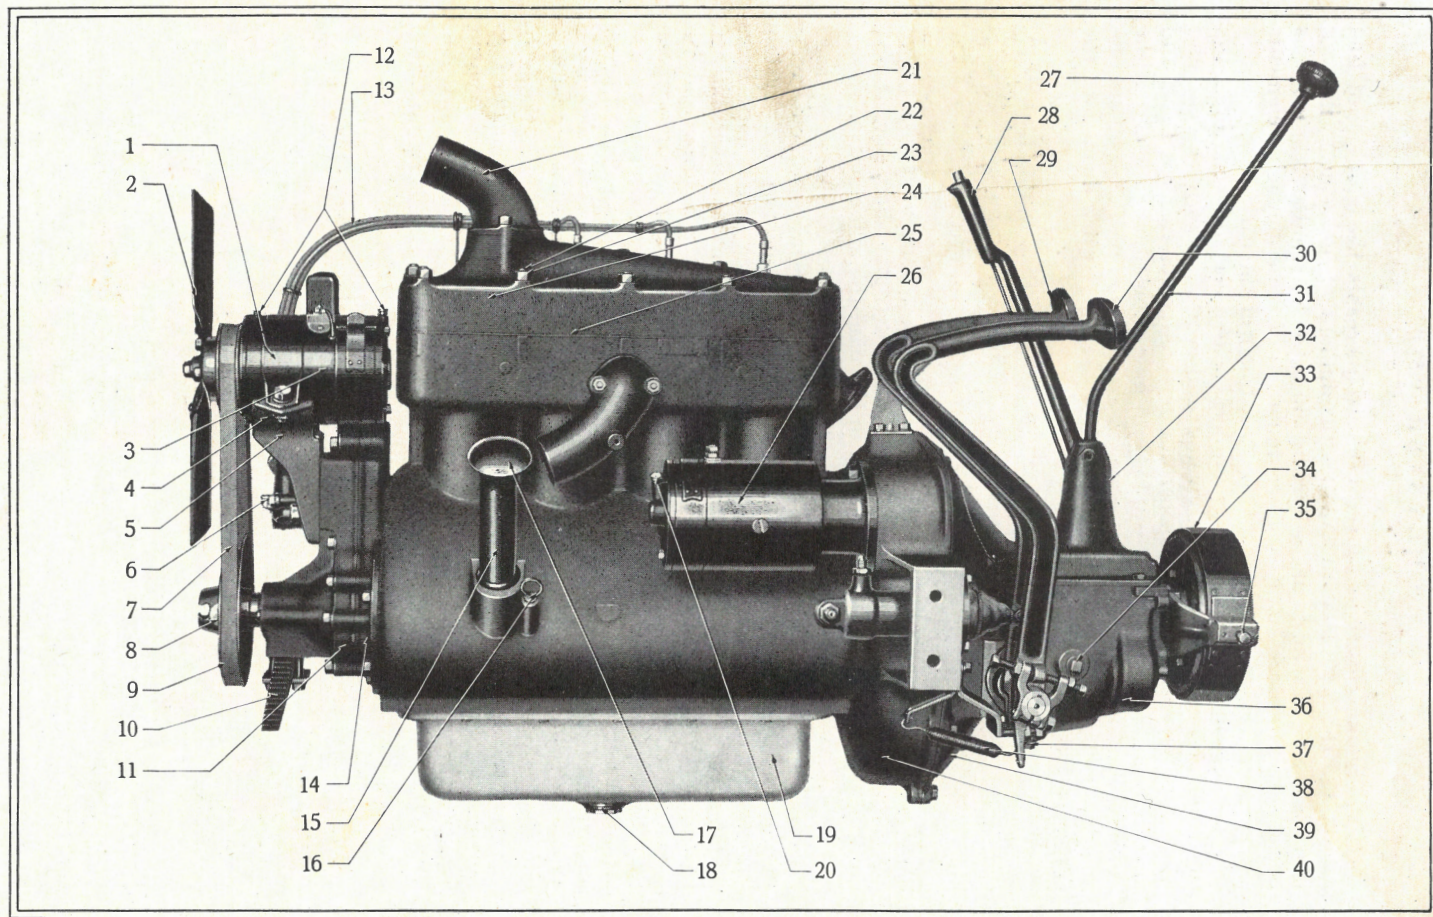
Left Side View of Power Plant (with Hydraulic Brake Equipment)
